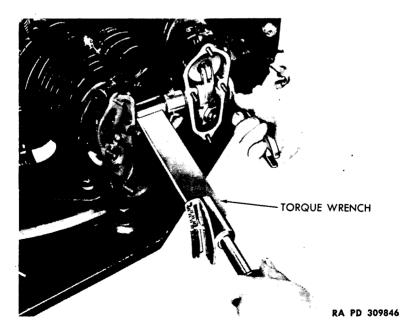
Tightening Rocker Arm Hub Bolt and Nut
